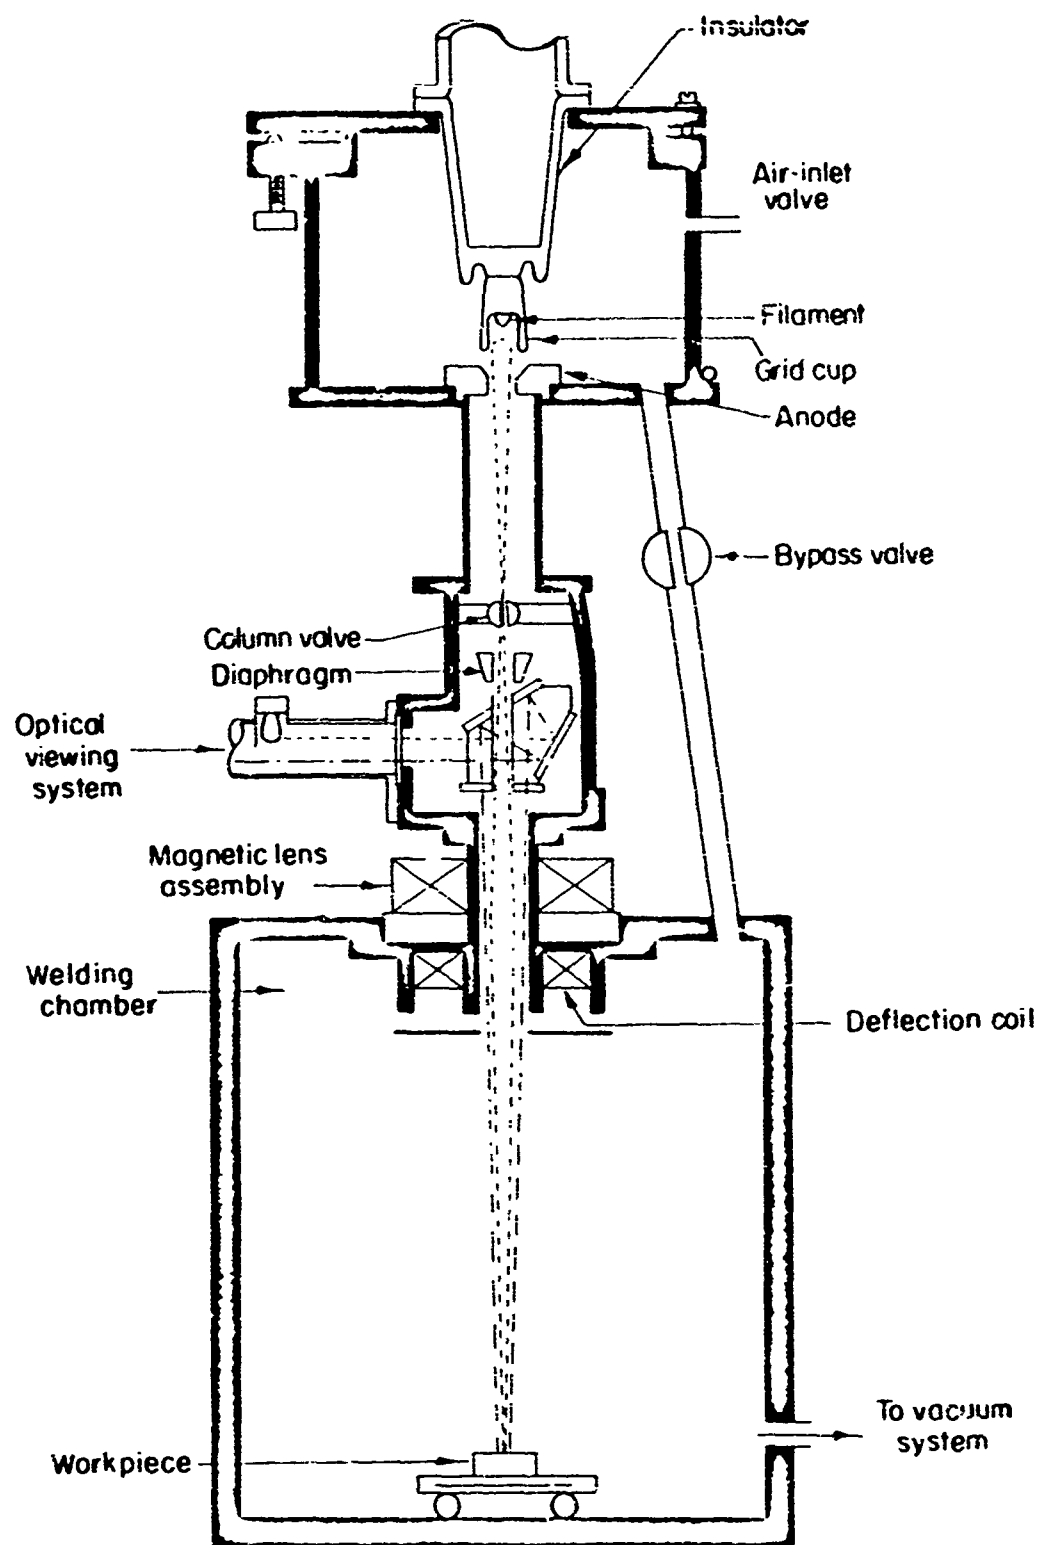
SCHEMATIC DIAGRAM OF AN ELECTRON-BEAM WELDING MACHINE (REF 68)
